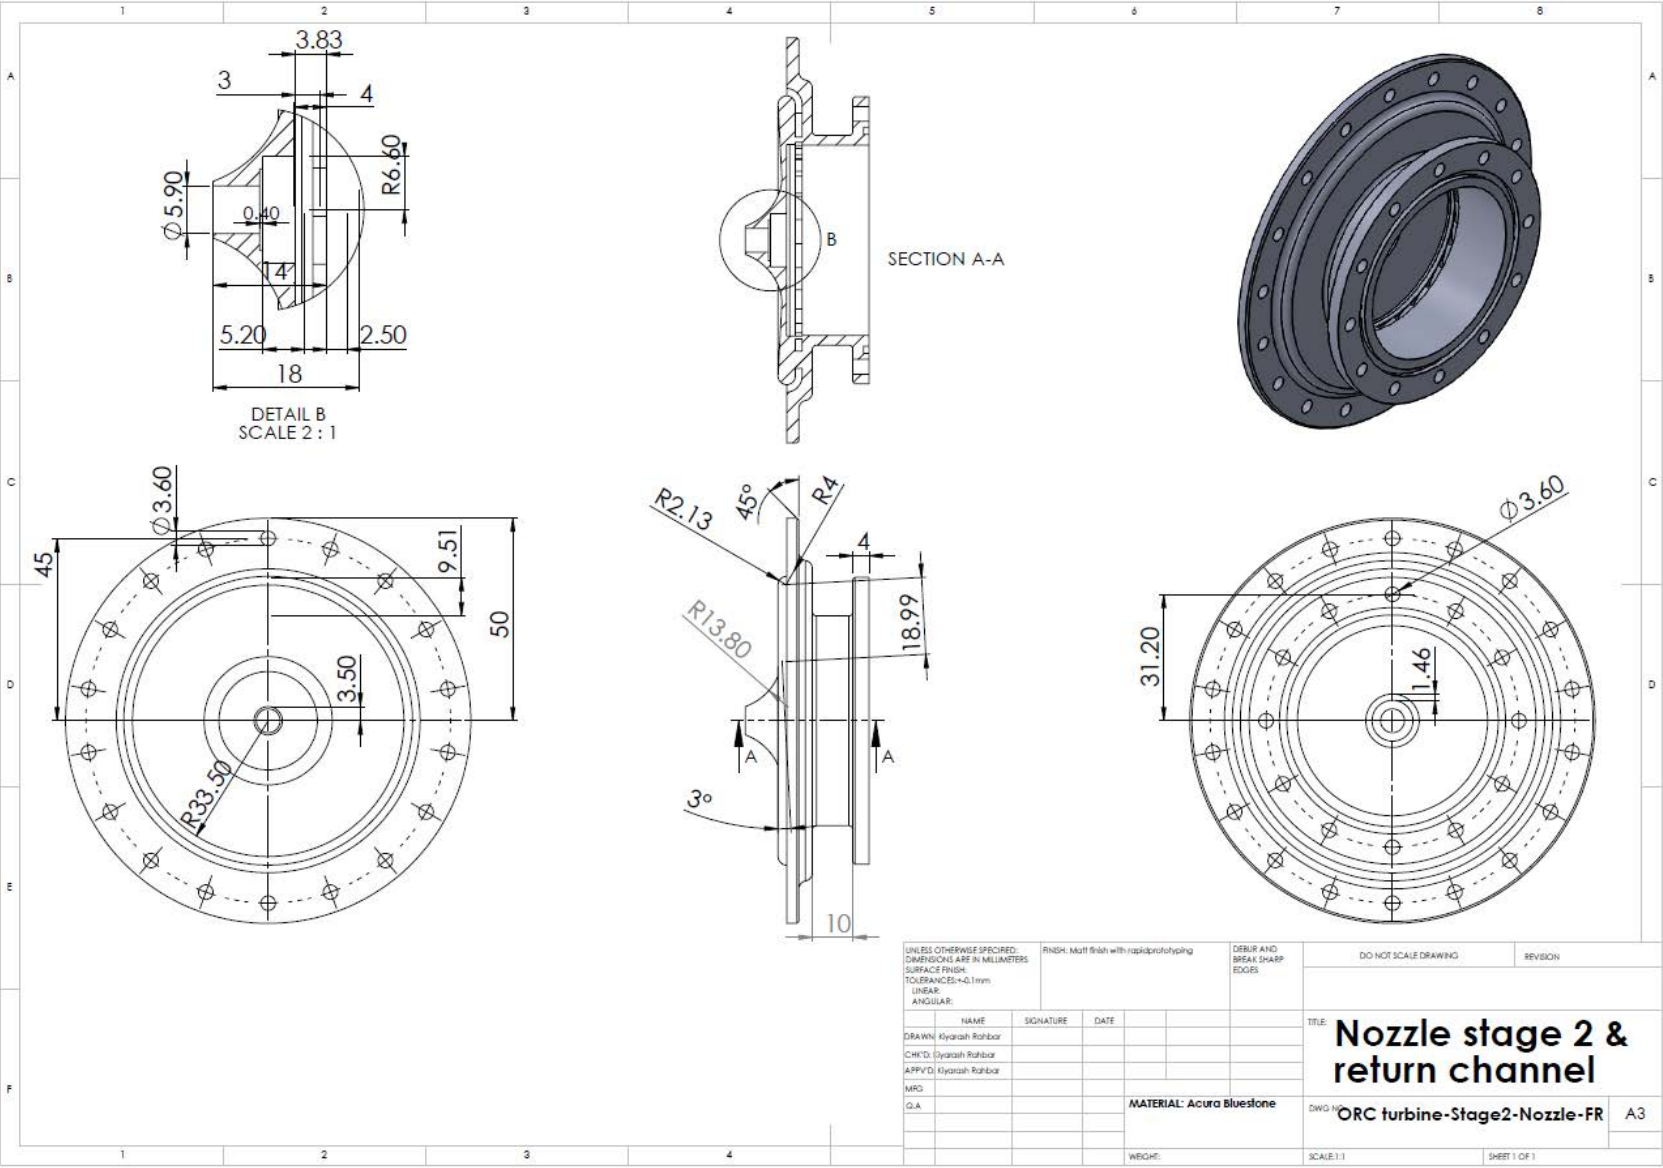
Nozzle stage 2 and return channel- detailed two-dimensional drawing
